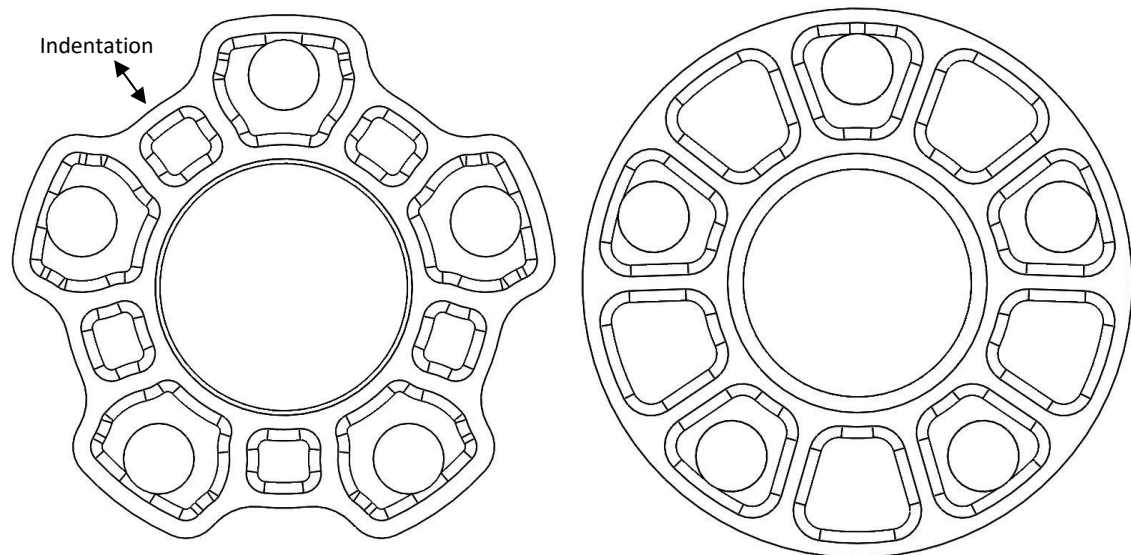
Front view of the inner hub. Prototype (Left) Production (Right)
